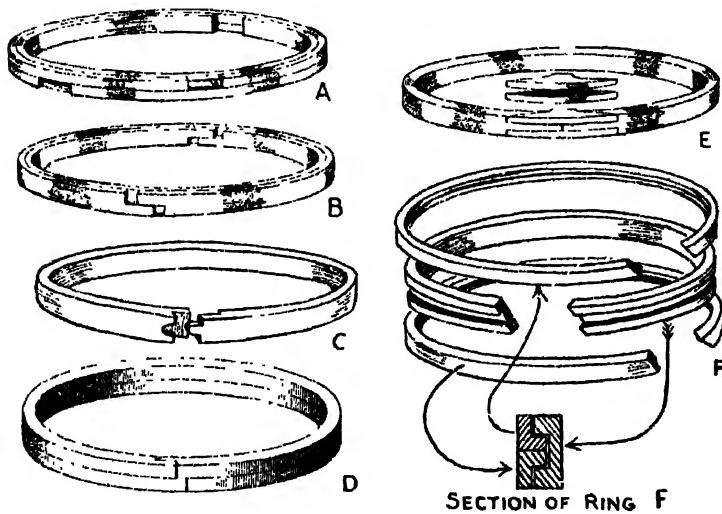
Leak Proof and Other Compound Piston Rings.
